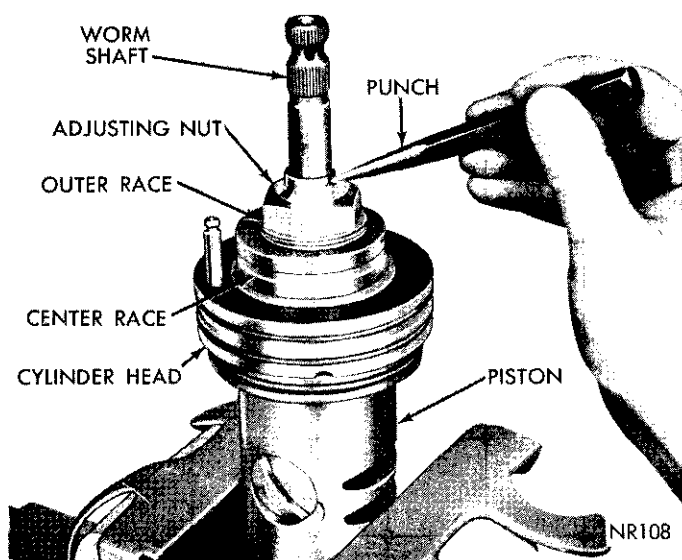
Staking Worm Shaft Bearing Adjusting Nut
